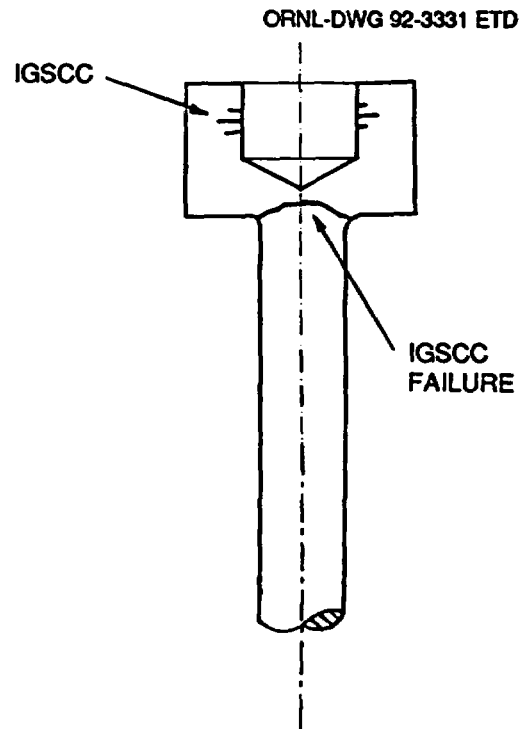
KWU-built PWR core baffle bolt failures
